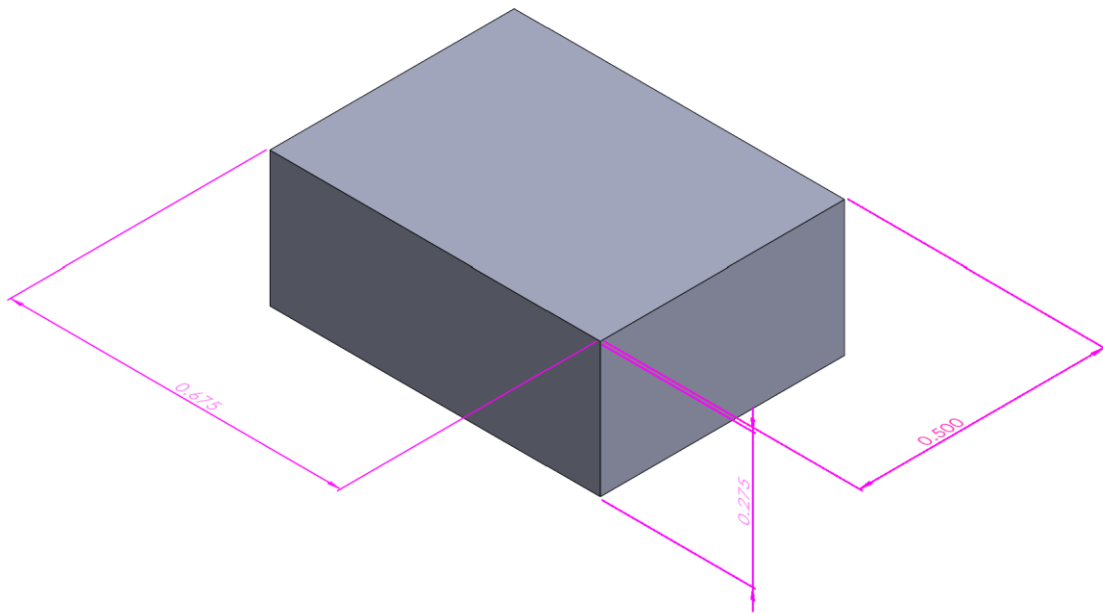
Geometry for XYZ dilatometry specimen showing major dimensions
